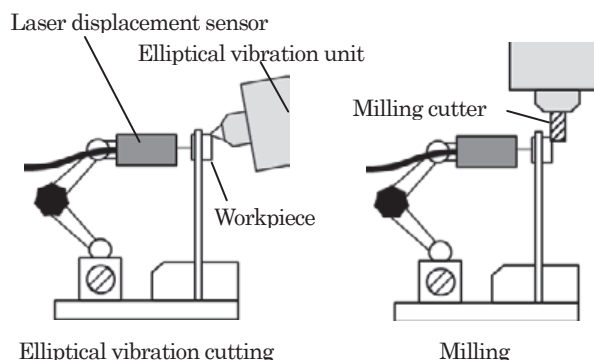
Experimental set-up for measuring displacement of thin workpieces under cutting.
